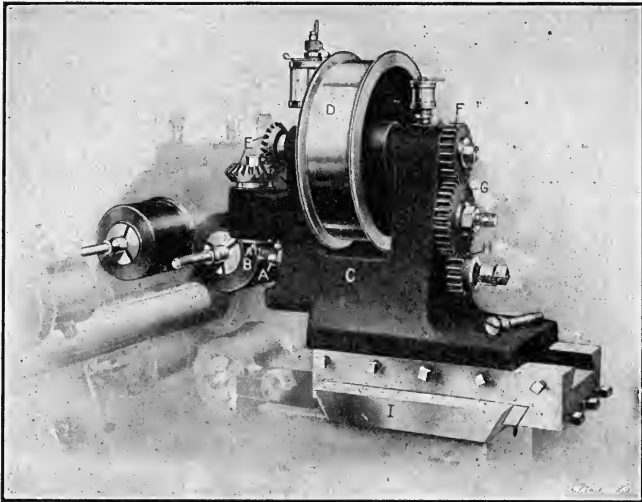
Acme Cross-drilling and Milling Attachment with Spindles located at Right Angles
